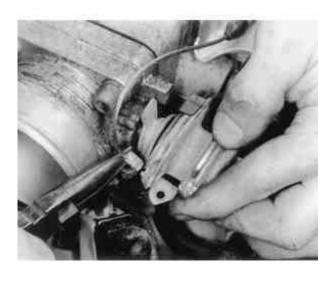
Remove the throttle cable mounting bracket bolts before removing the intake manifold collector
